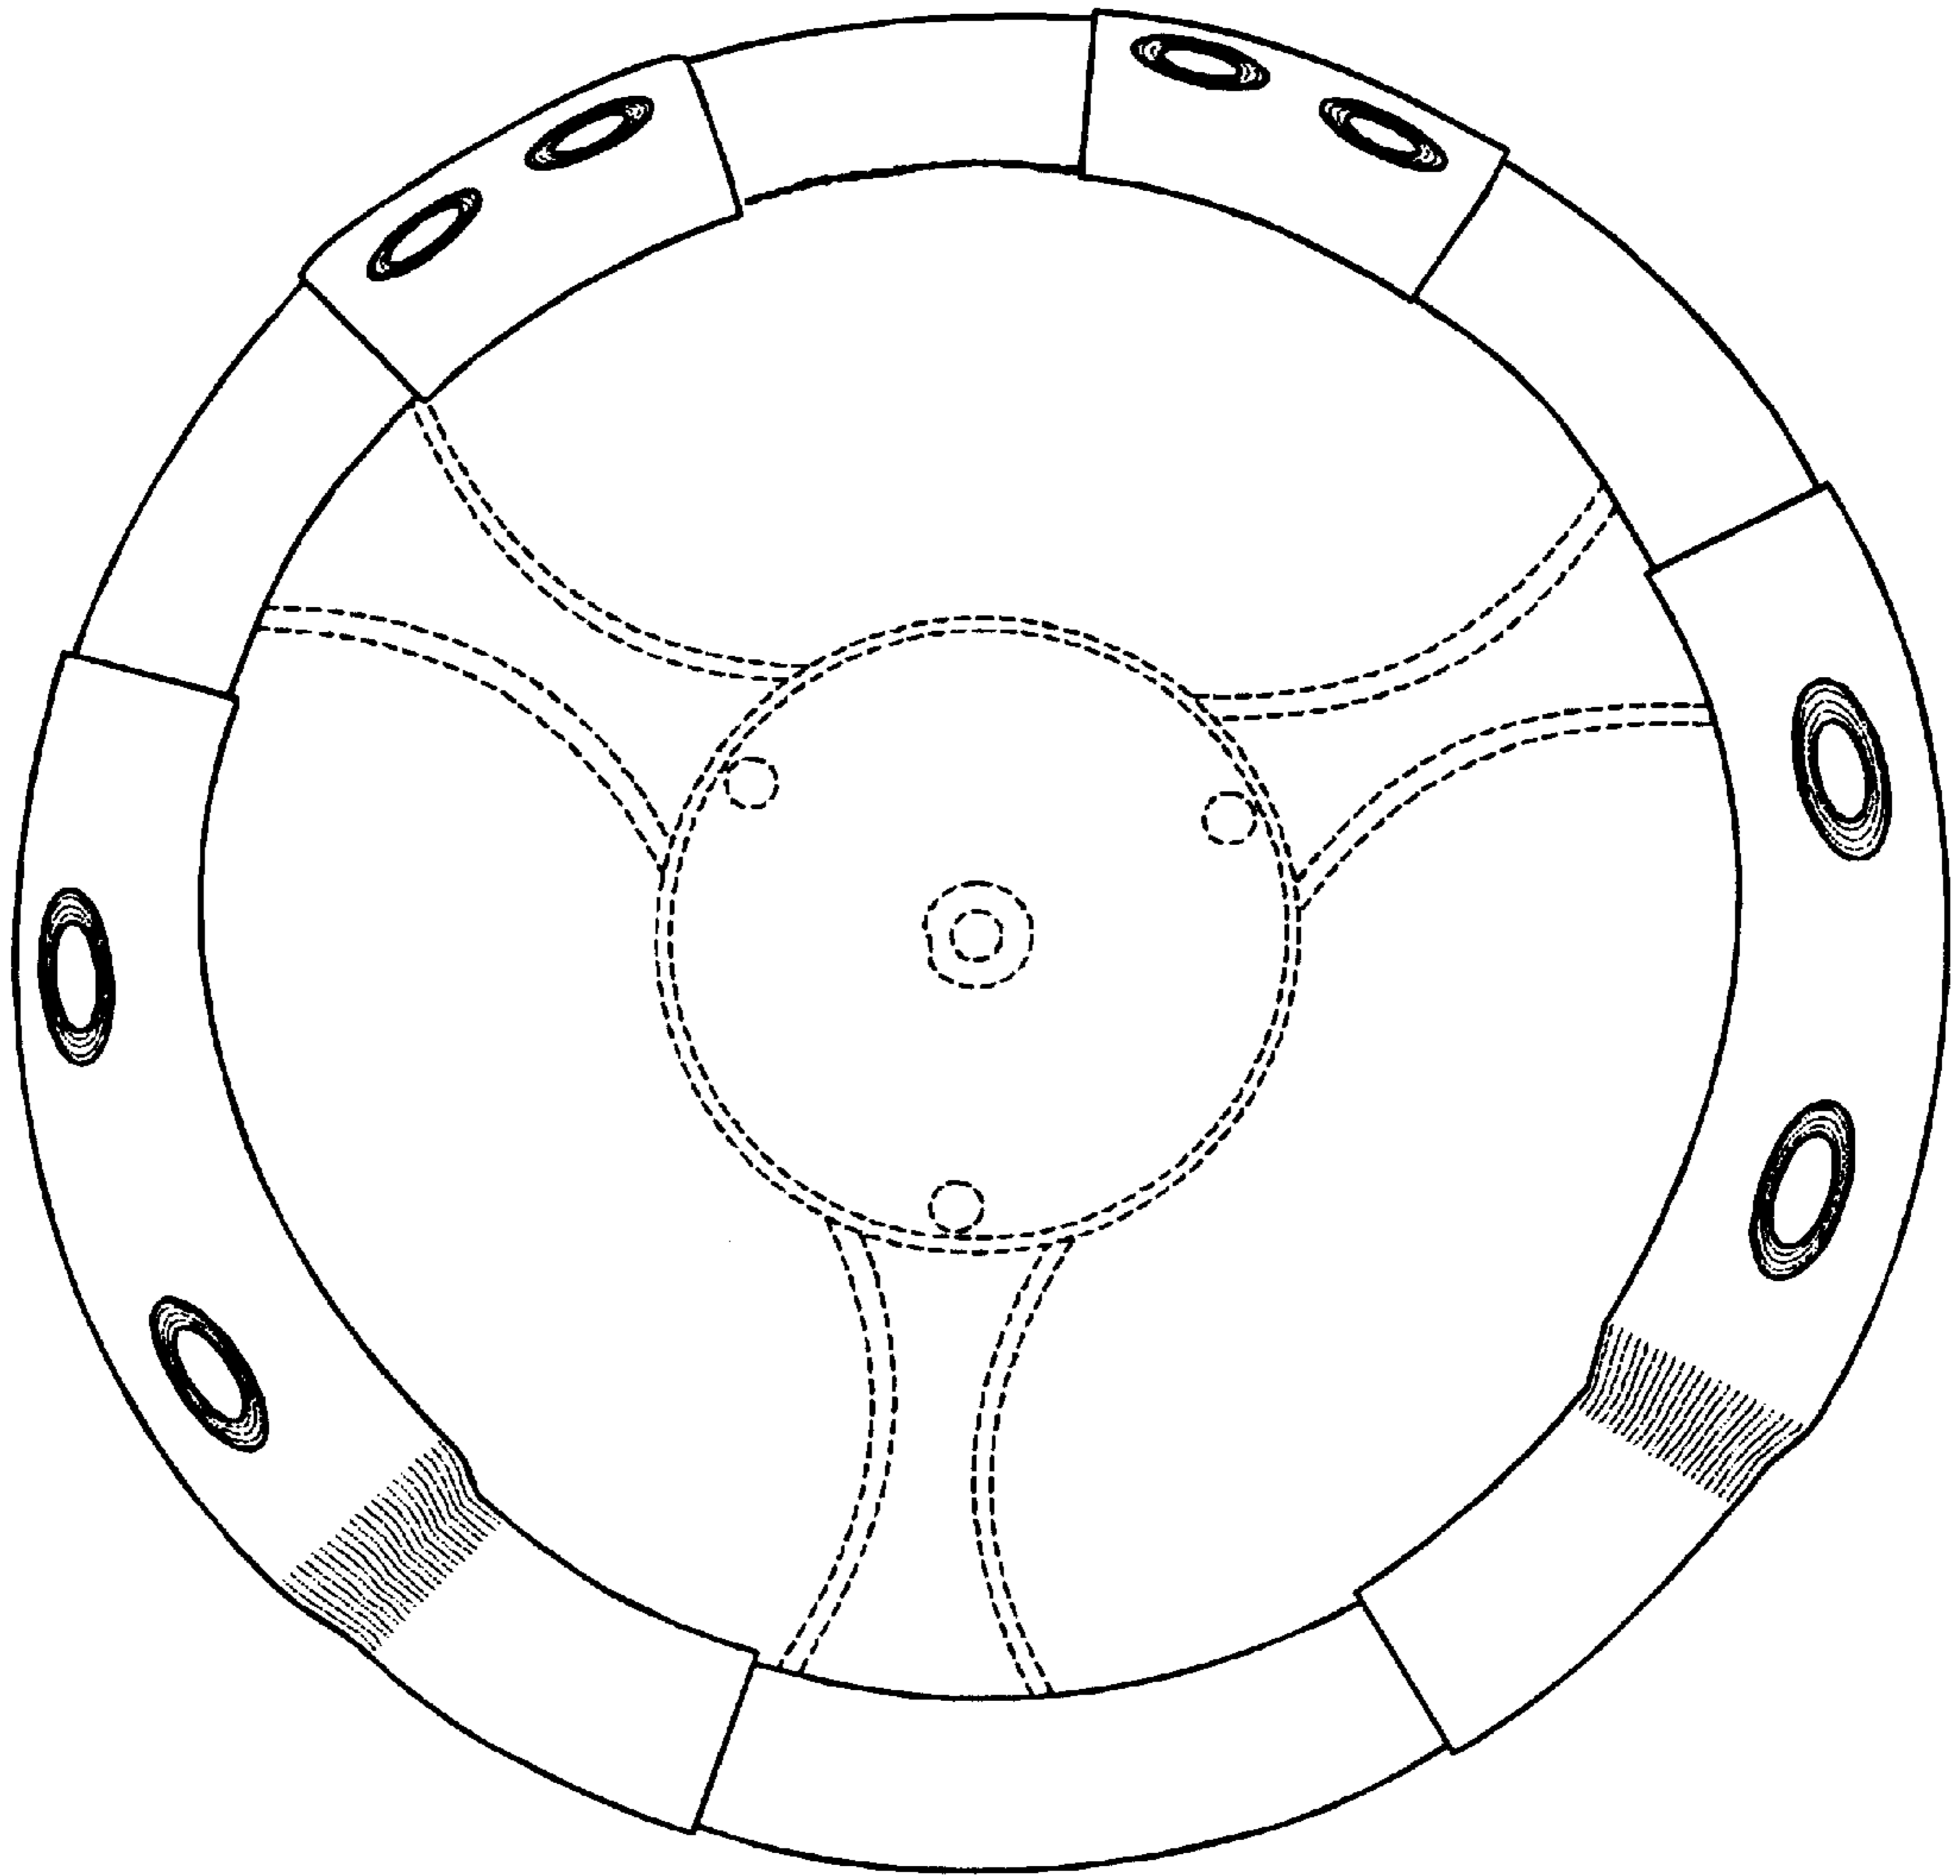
is a front perspective view of the steering wheel cover showing my new design. The placement of a typical steering wheel is shown by dotted lines.
